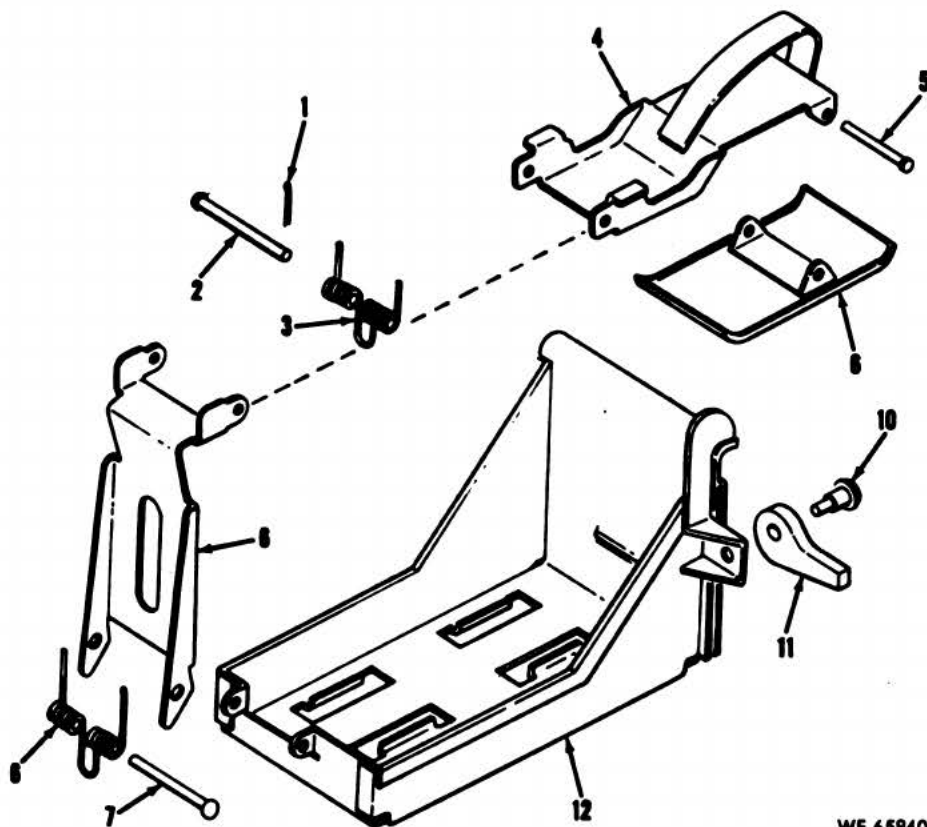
Tray assembly, ammunition box—6590078—exploded view.
